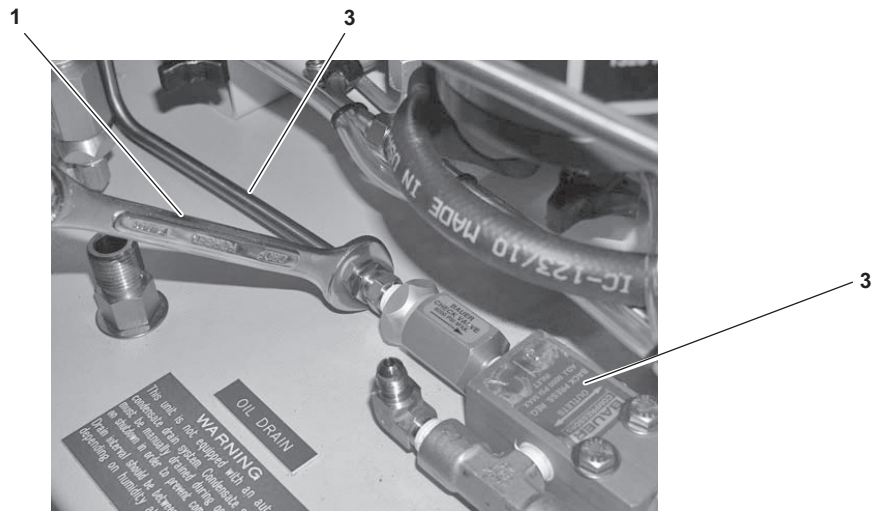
Flare Fitting at Pressure Maintaining Valve
